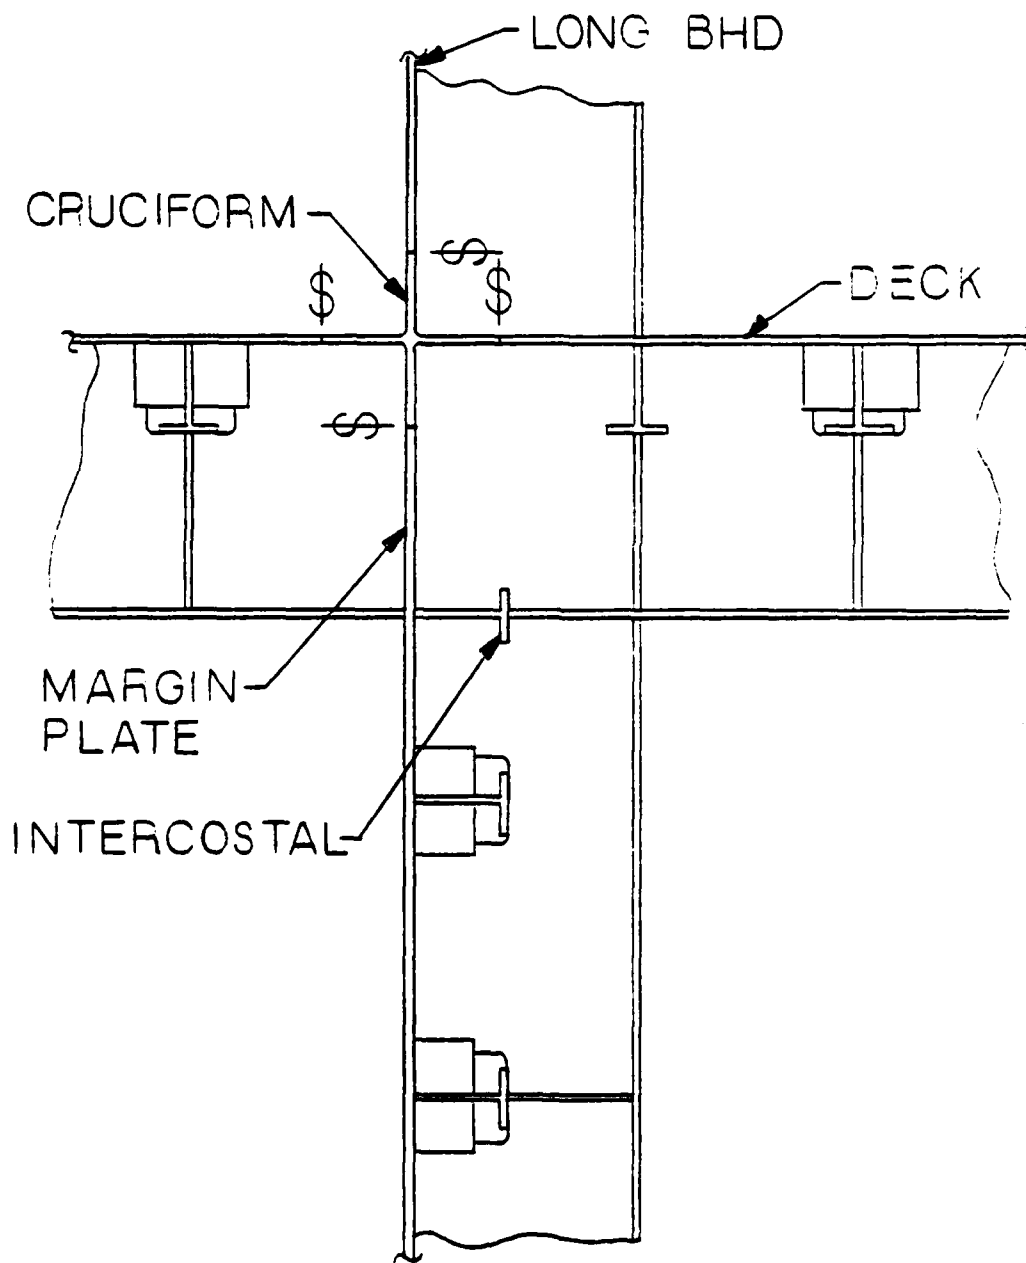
Longitudinal Bulkhead and Deck (with Framing)
